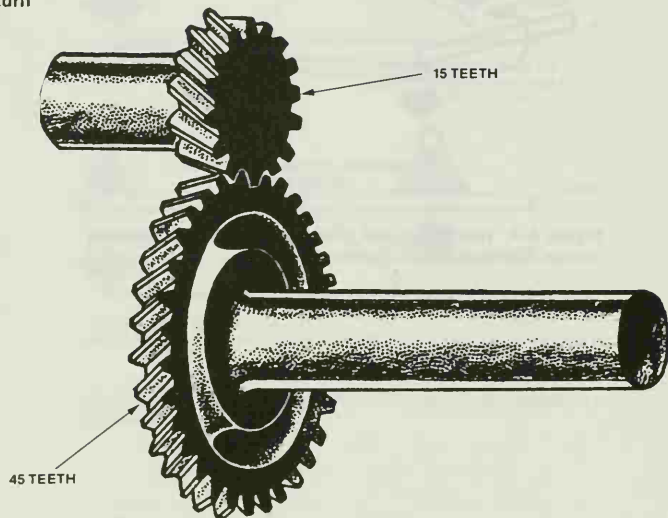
The gear ratio three to one (3:1) is determined by dividing the number of teeth on the small gear into the number on the larger gear. (General Motors Corporation)
